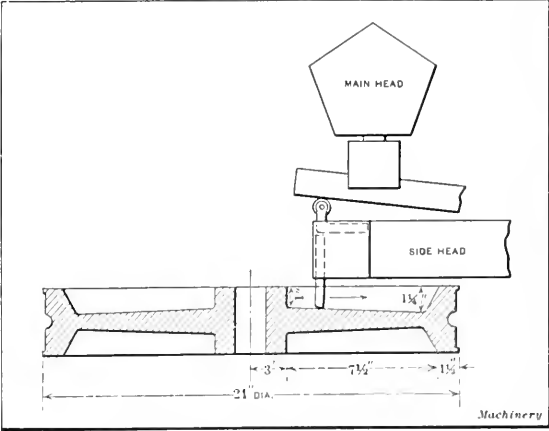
Set-up on a Bullard Vertical Turret Lathe for machining a Beveled Surface on a Machine Steel Disk. For "Productograph" Record, see Fig. 5
